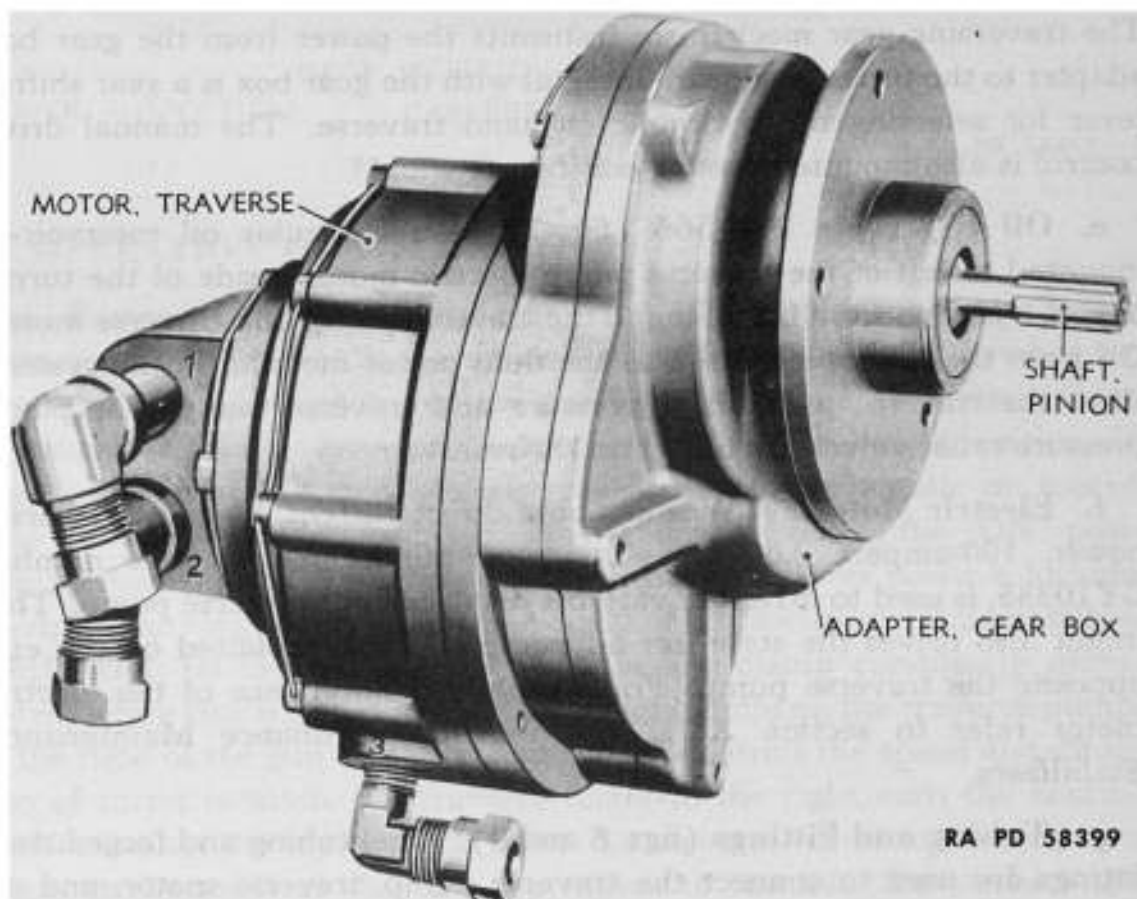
Three-Quarter View of Traverse Motor and Gear Box Adapter
